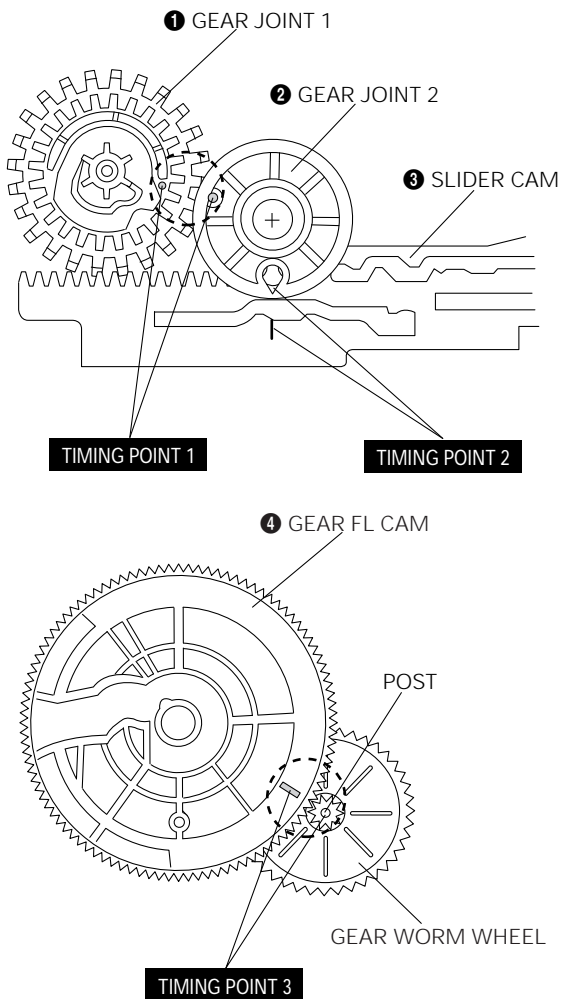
Assembly of Gear FL Cam, Gear Joint 1,2
